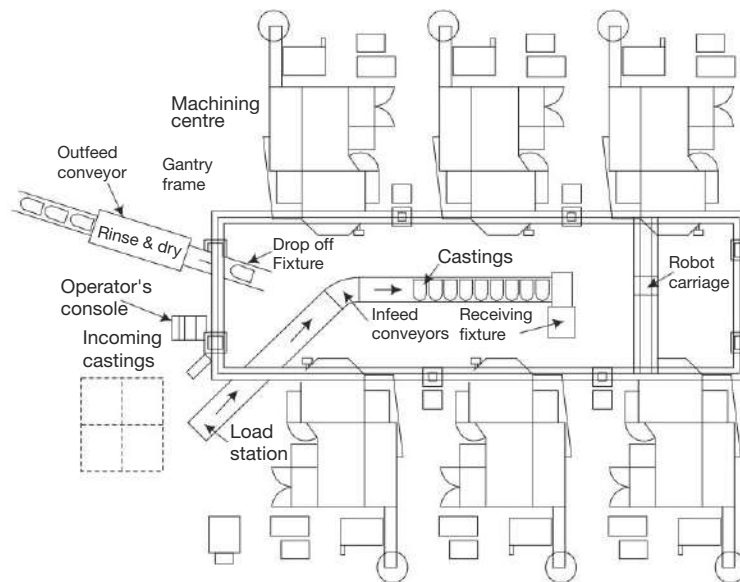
A typical machining cell with a number of milling machines with a gantry robot
